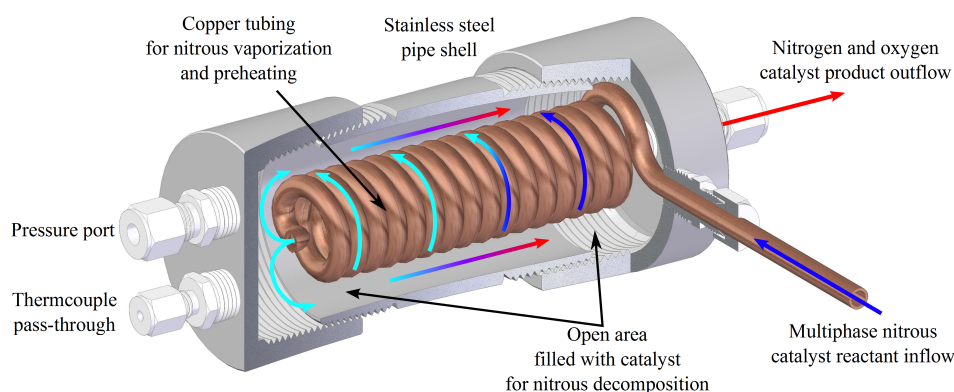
Design of the 2-inch igniter prototype, showing the modified shell and tube heat exchanger.
